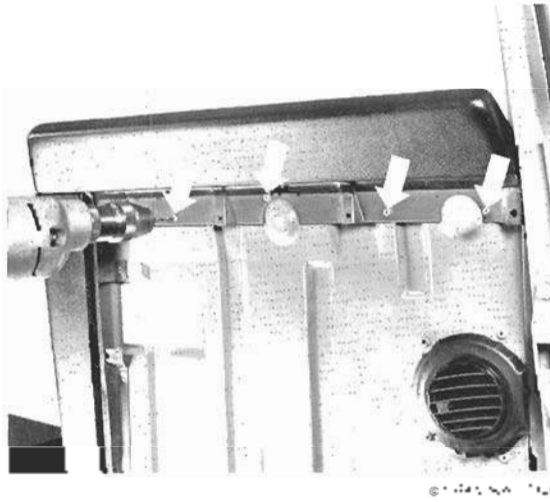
Rivets for padded strips being drilled out. Four similar rivets hold the side padded strip.
